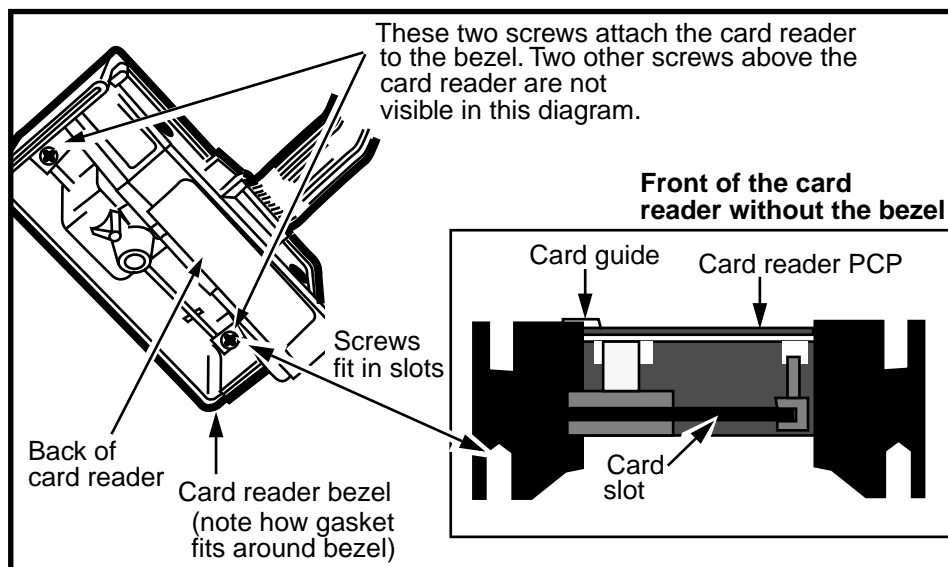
shows what the card reader assembly looks like with card reader and bezel attached.
